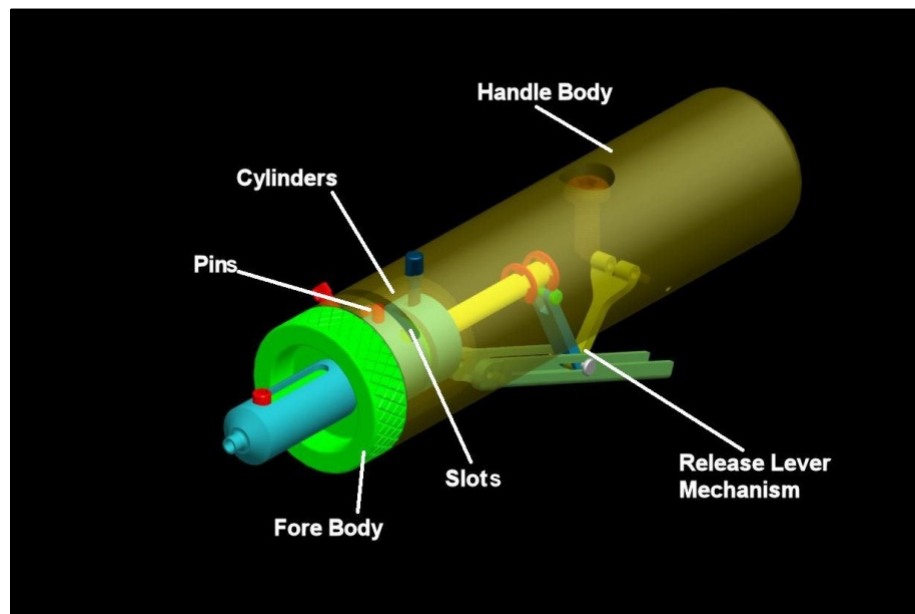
IMPROVED ACTUATOR DESIGN
